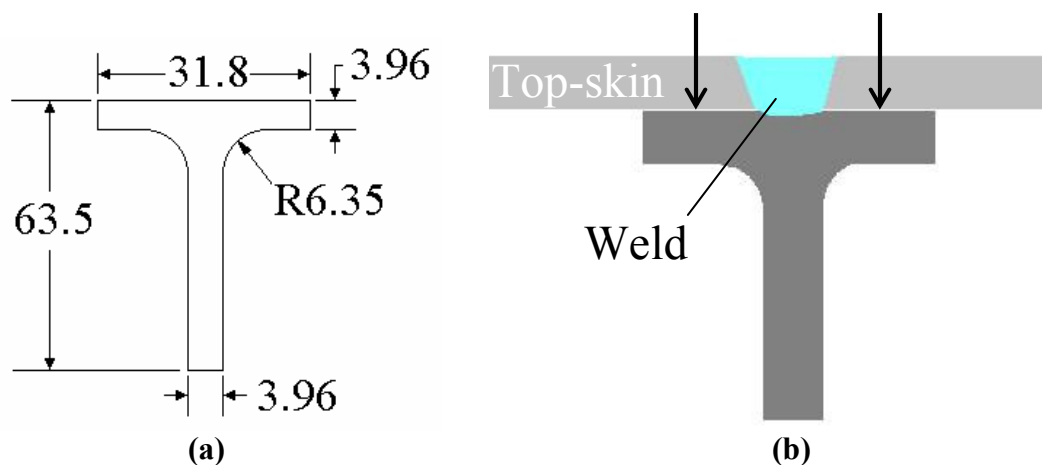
(a) Cross-section schematic with dimensions in mm of 357-T6 T-rail. (b) Cross-section schematic of friction stir welded lap joint. Arrows denote faying surface gaps.
